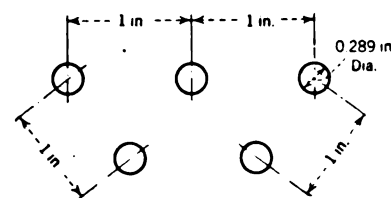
ARRANGEMENT OF FURNACE HEATING ELEMENT RODS
